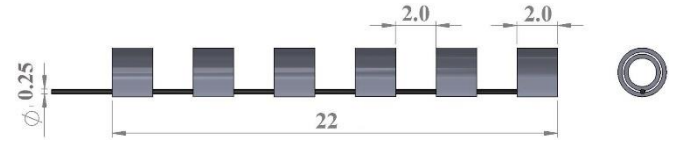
The final steerable tip design with clamped stainless-steel rings on a nitinol rod with dimensions in mm. The pulling cable is not shown.
